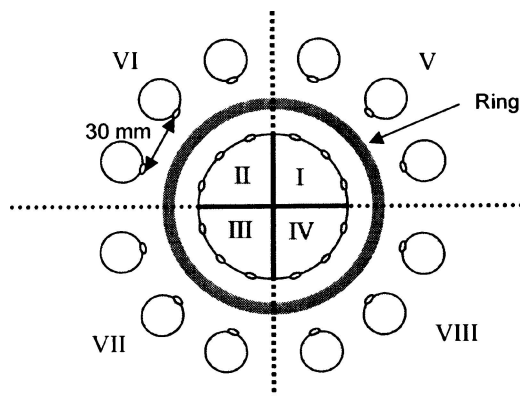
Schematic of gas quenching process of spray formed 100Cr6 rings [4].
